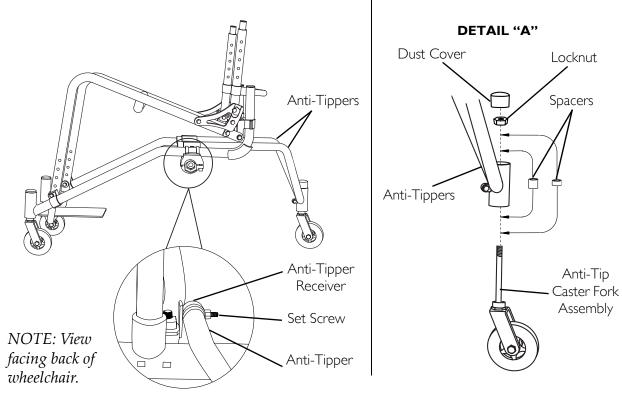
Swivel Anti-Tip Installation/Removal/Adjustment
